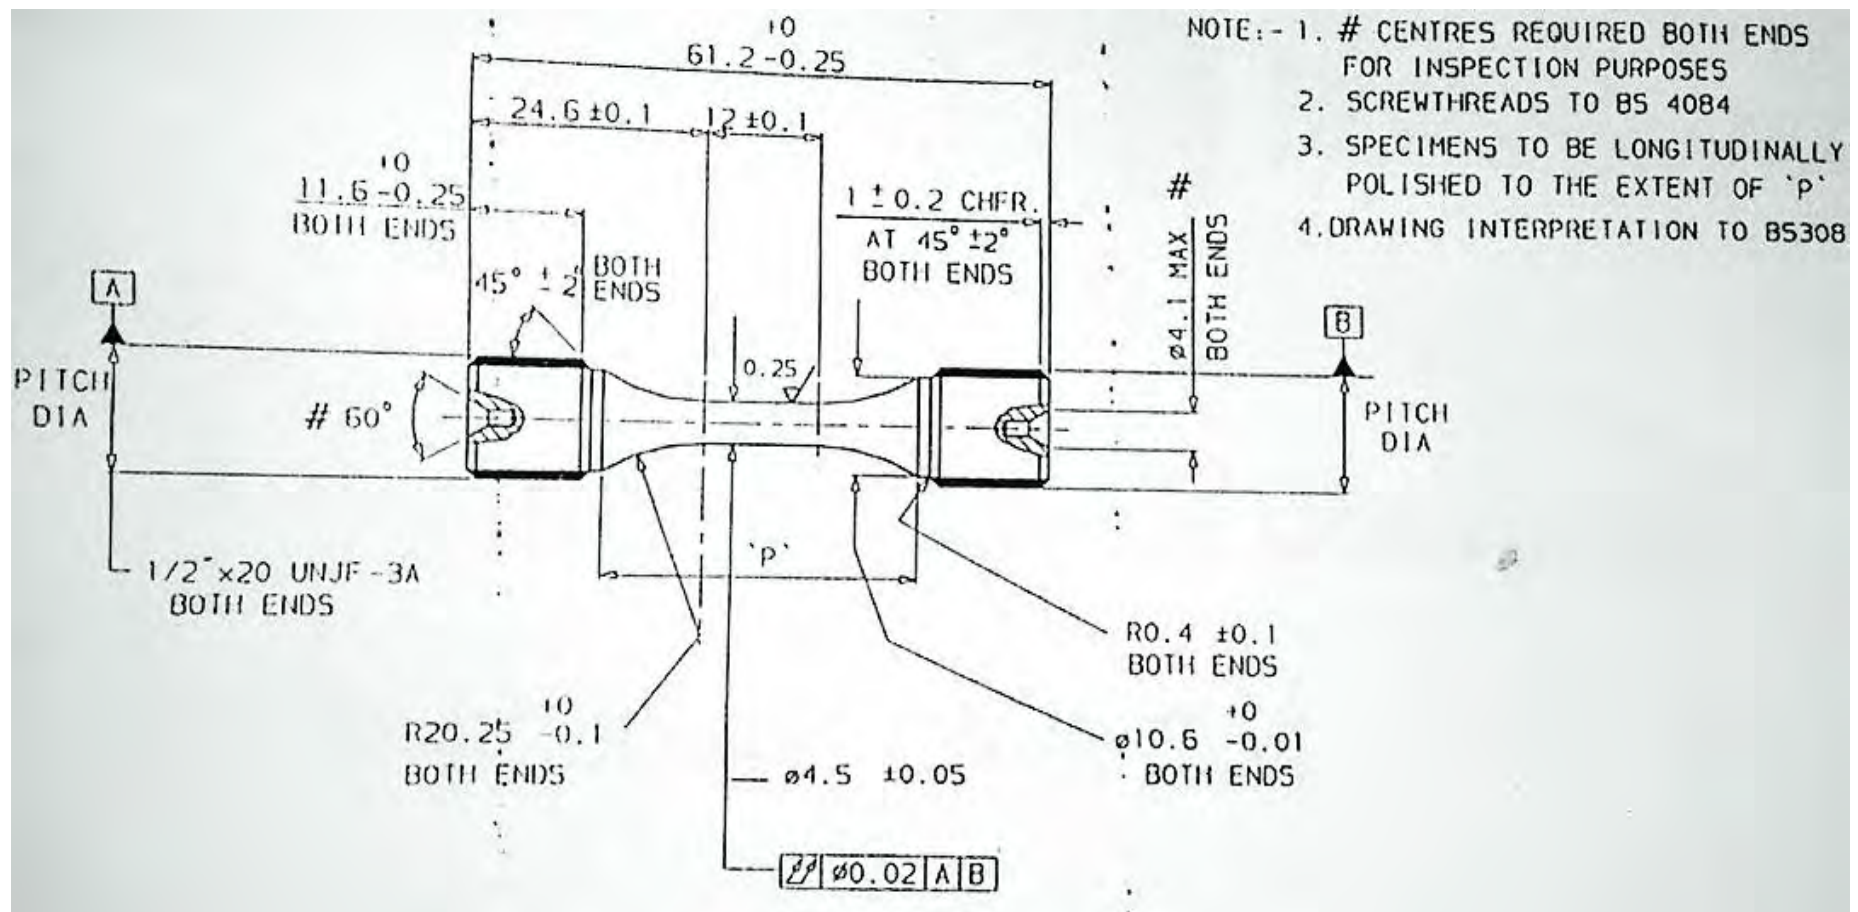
Geometry of cylindrical specimens used for high cycle fatigue tests based on RR drawing RLH 10007
